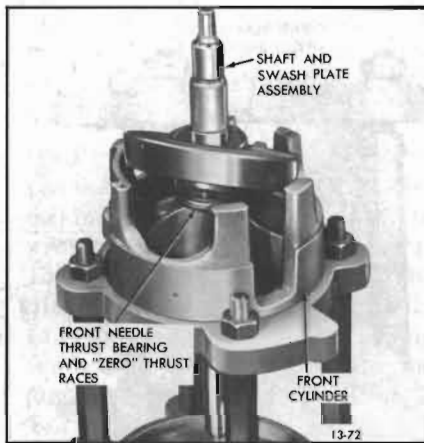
Shaft and Front Needle Thrust Bearing in Cylinder Half
